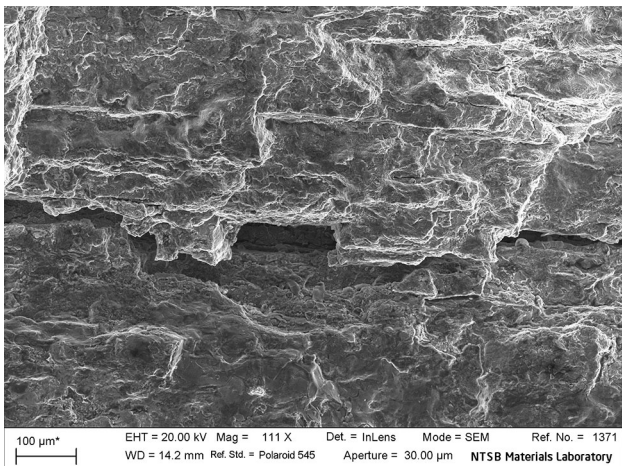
Secondary electron (SE) micrograph showing branched secondary cracking into the fracture surface at the end of the crack
